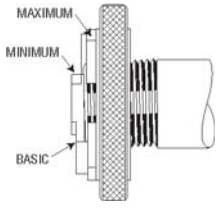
Checking major diameter truncation with 6 step plain ring gage.
